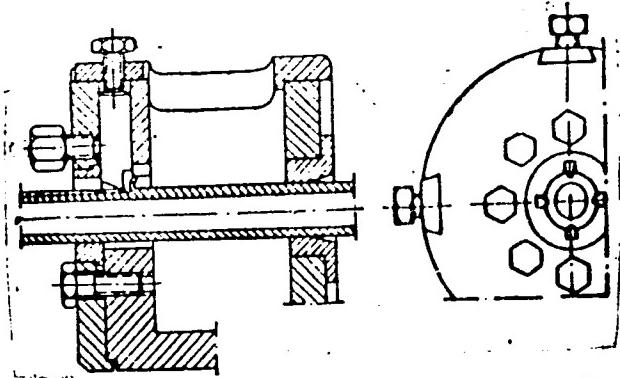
Yoke for drawing longitudinal channels on the outer surface of pipes.
